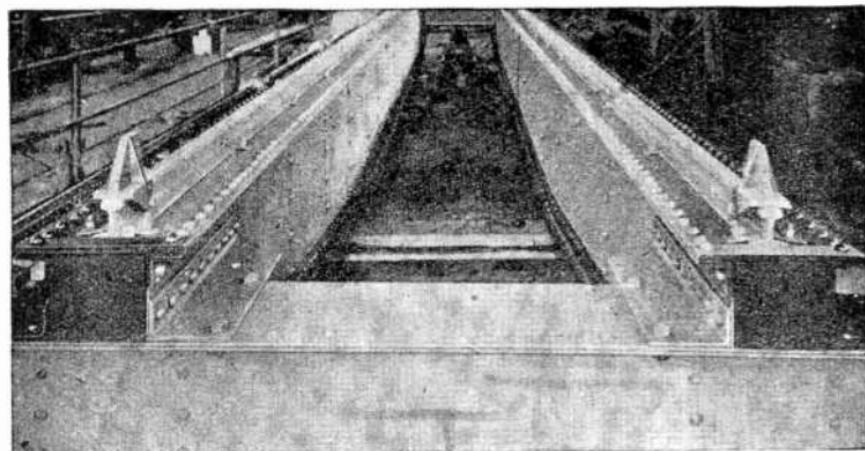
,874.—*Euclid crane construction 1. Double web box girder bridges.* The girders are reinforced by means of channel diaphragms at close intervals. The end trucks are of the box type, made up of heavy channels and plates. The illustration shows the way the girders are notched out and rest upon the top of the end trucks.
